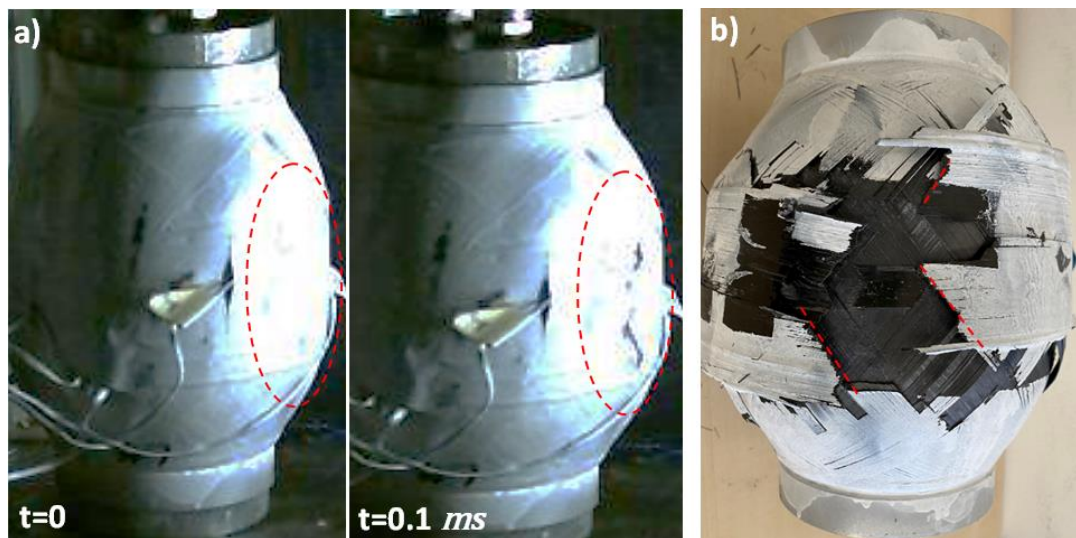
(a) High-speed camera images and (b) fracture surface of XXO with no defect
